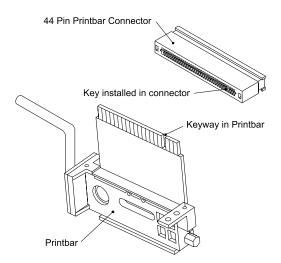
Illustration of the printbar showing the orientation and attachment edge for the 44-pin *Printbar Cable.
